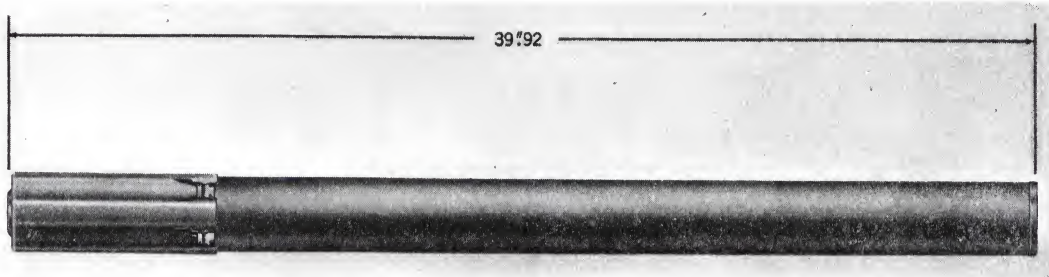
2.75-Inch Rocket Motor Mk 40 Mod 0, External View.
